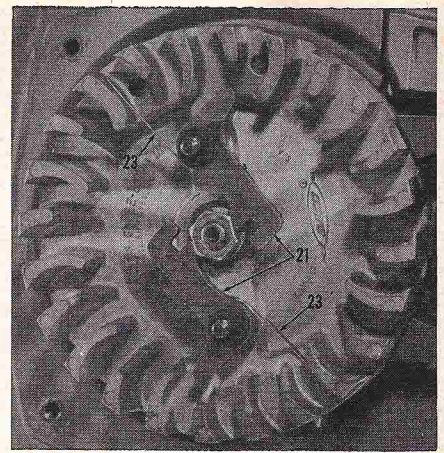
When installing starter pawls (21), be sure that pawl return springs (23) are located in flywheel vanes so that they are parallel to the pawls as shown.
